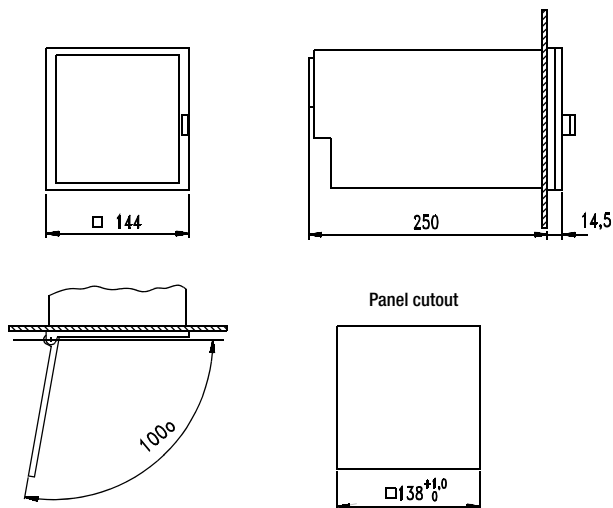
Dimensional drawing LINAX 4000L (dimensions in mm)
